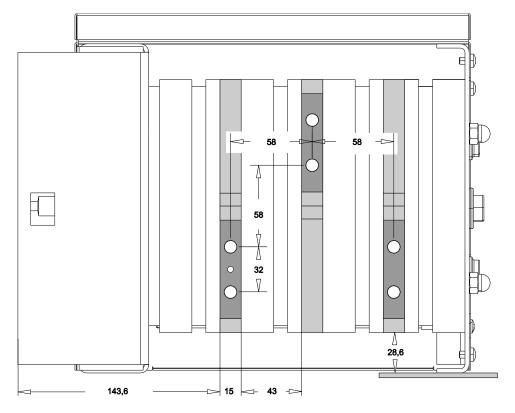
Busbar joint dimension form back side. All dimensions in millimeters.
